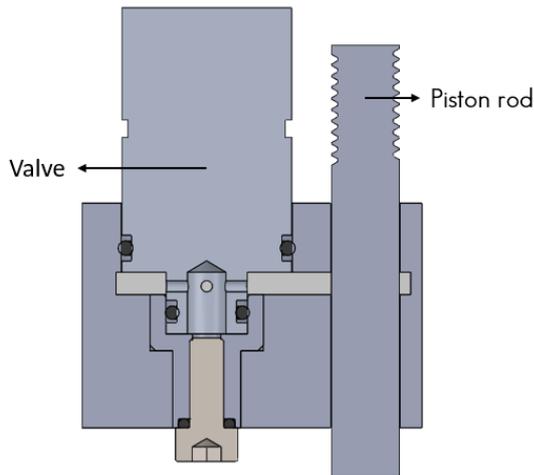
Section view of the parallel horizontal orientation concept in the cylinder head
